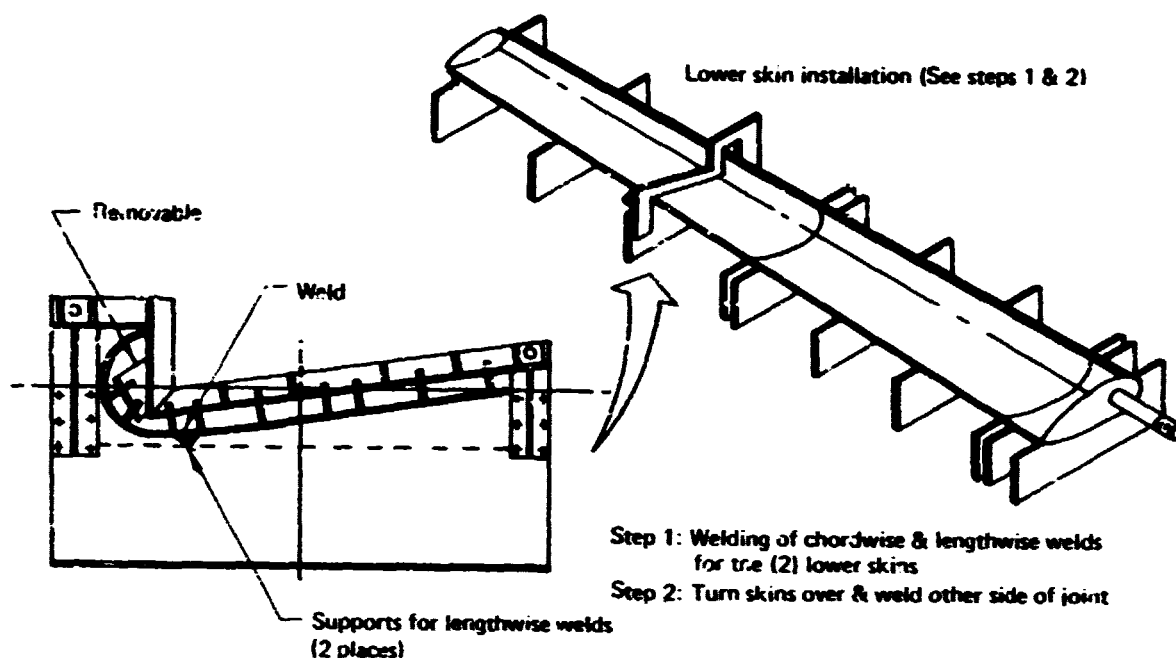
Outboard Section (Sta 1260 to Sta 1800)
